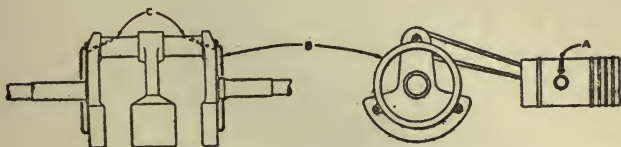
“I. H. C.” METHOD OF OILING CRANK PINS
